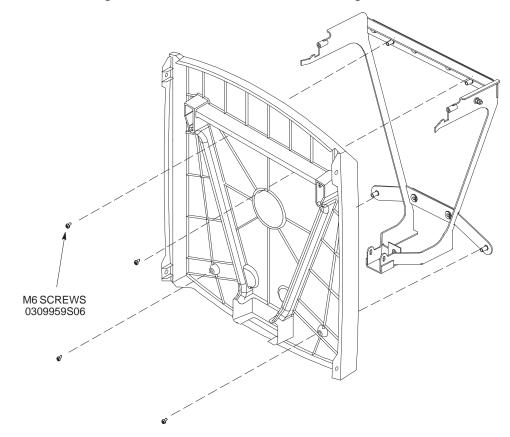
Attaching MicroCell Back Solar Cover to Mounting Bracket
